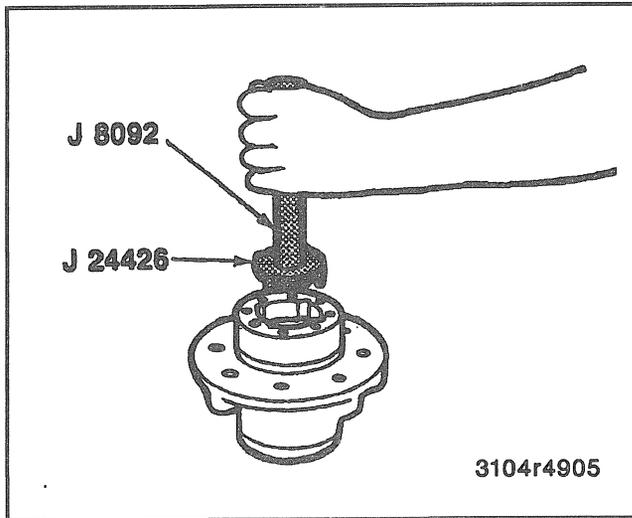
Seating Outer Bearing Cup onto Retaining Ring
